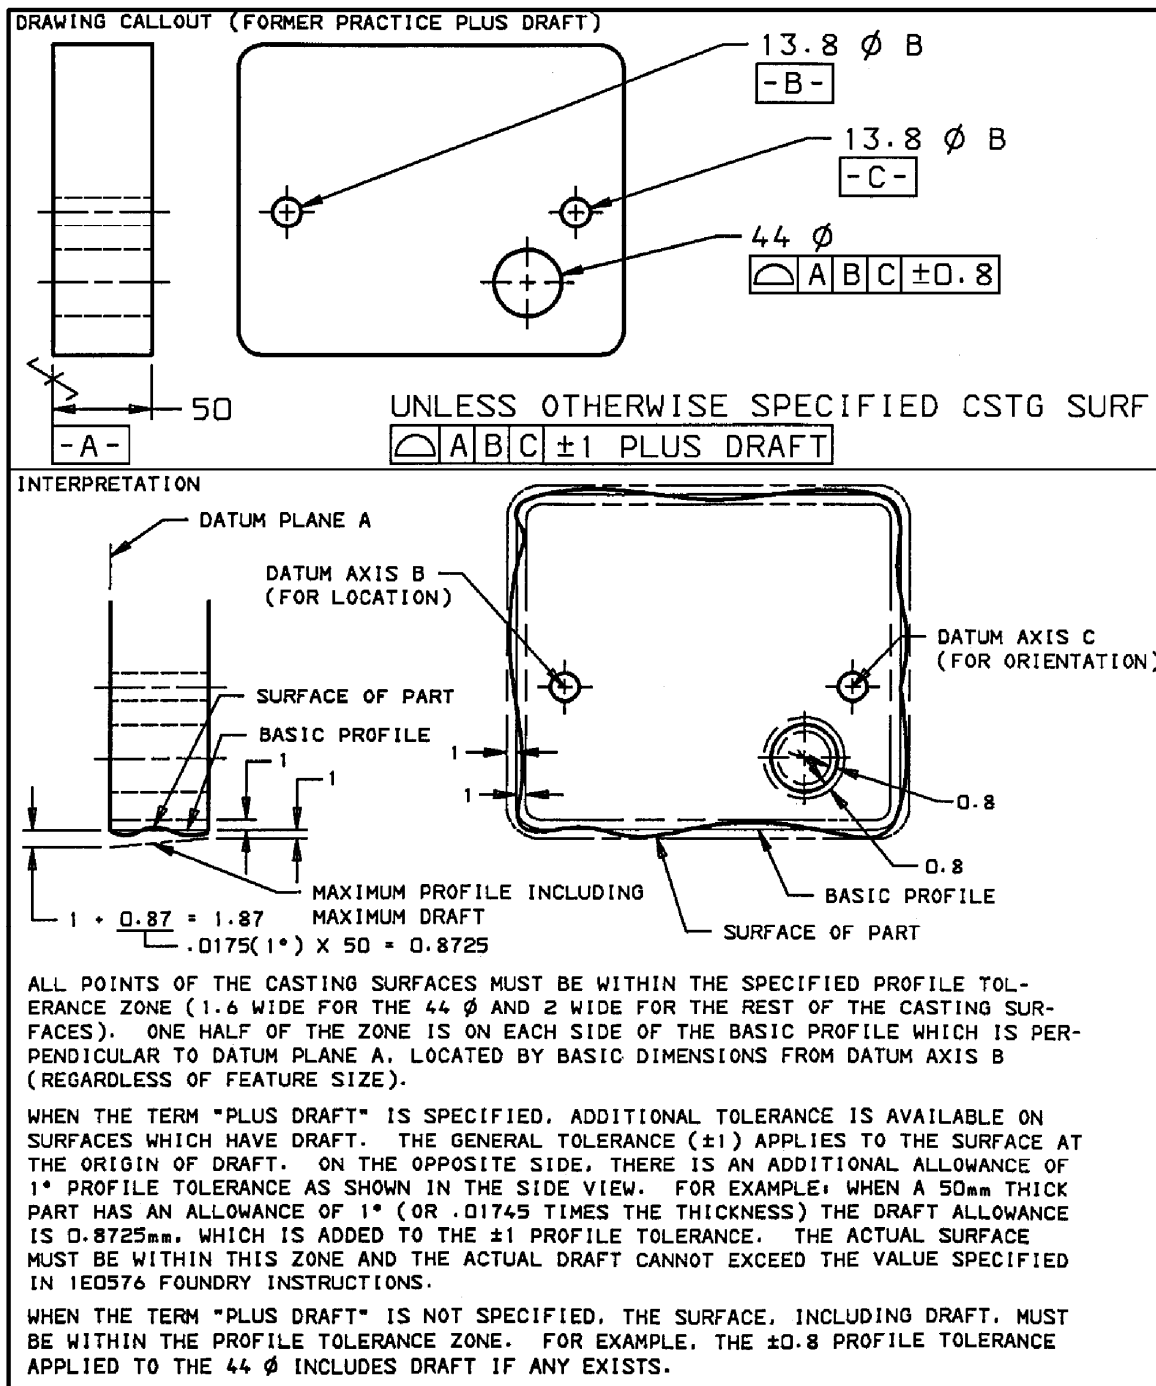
Profile Of A Surface Tolerance On Casting (Former Method)
